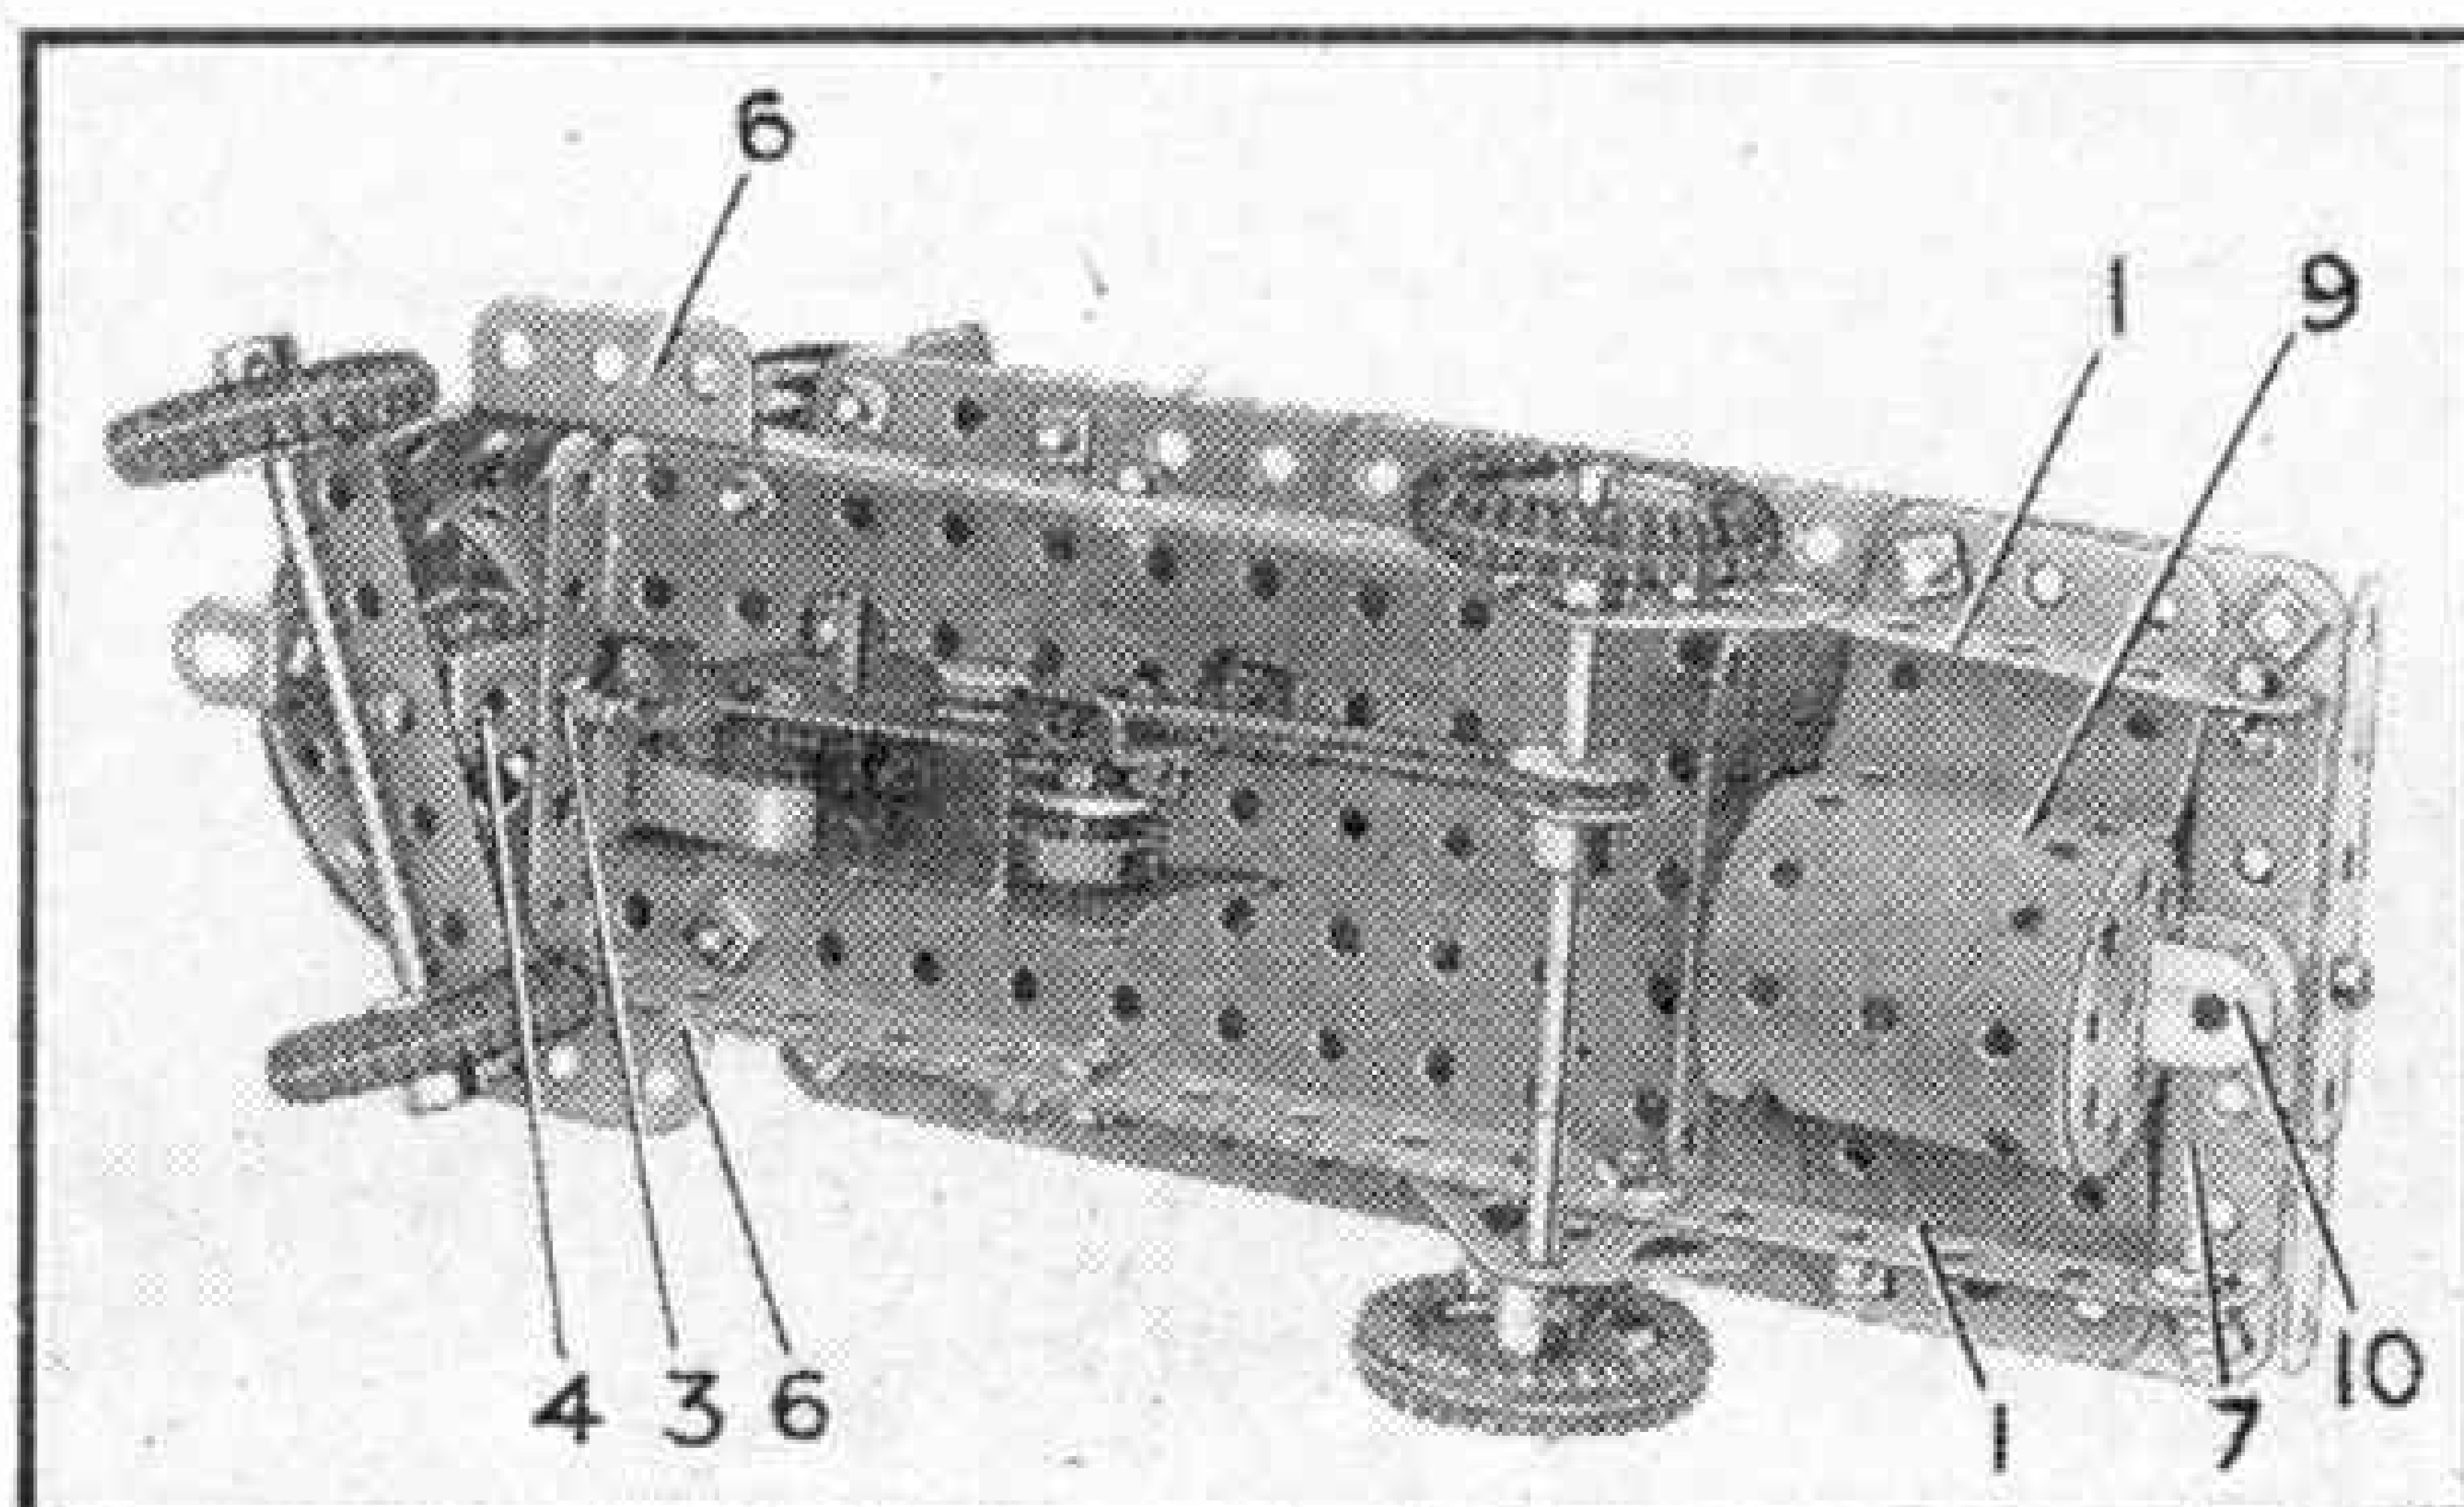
The steam lorry is driven by a *Magic* Motor, which is seen in position in this underneath view of the chassis.
